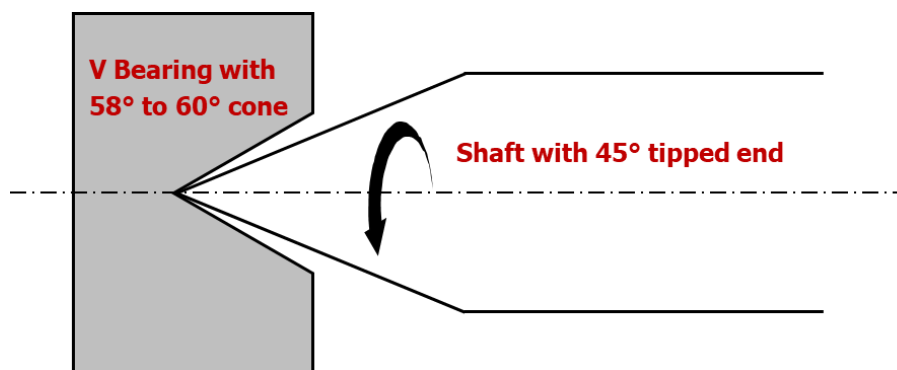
Setup of the Commercial V Bearing and the Tipped Rotor Shaft
